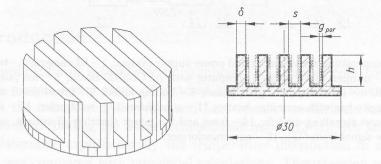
Finned sample view (before CPS covering) and its dimensions.
